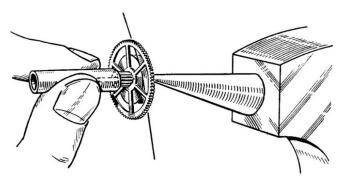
Method of Holding Facing Tool When Facing Pinion
